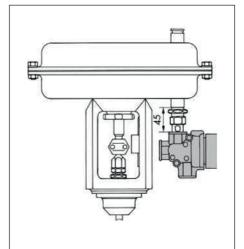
Mounting on linear actuators using CrNiMo steel pipe fitting
